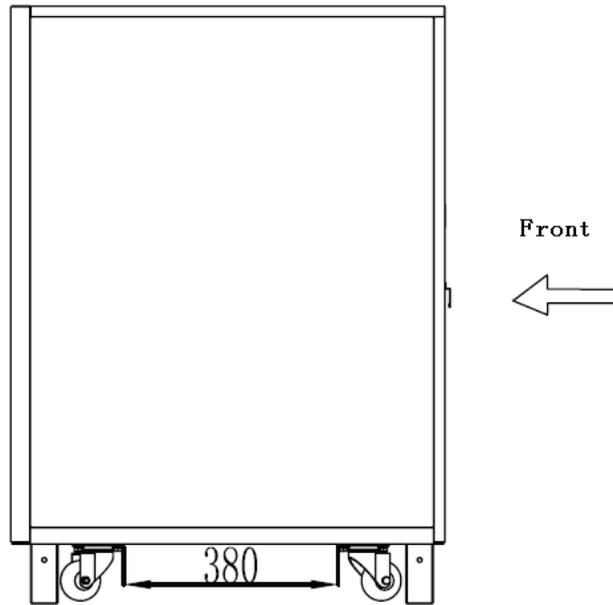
10 ~ 40 KVA transport (Unit: mm)
